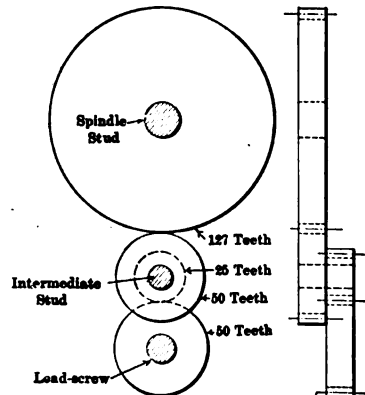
Example of Gearing for Cutting English Thread with Metric Lead-Screw.
